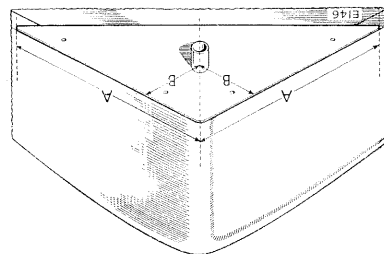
Fitting corner plate to bottom front corners of seat cushion
